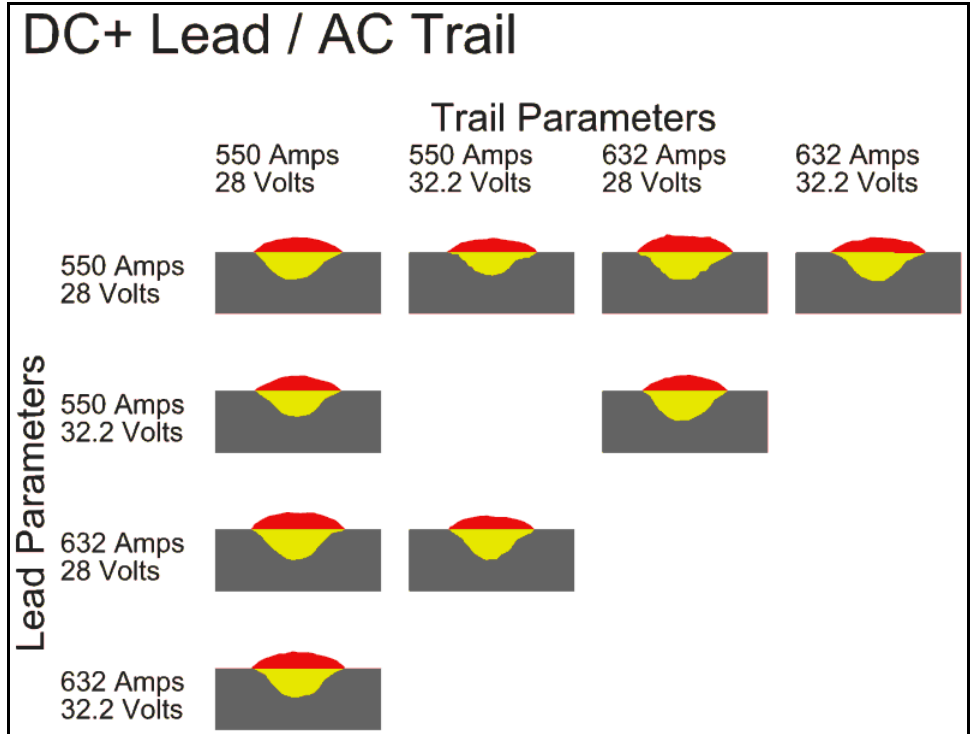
Group 2 DCEP Lead, AC-SQ Trail Tandem Weld Bead Cross-Sections
